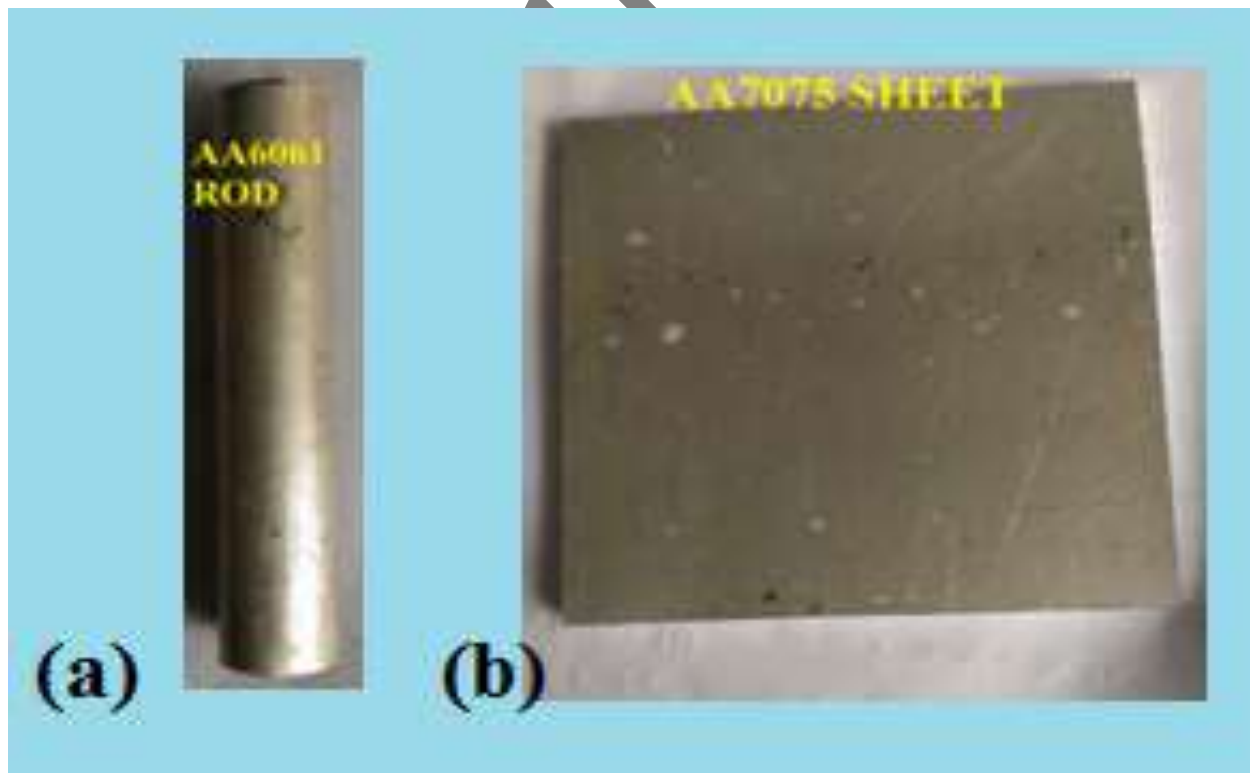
(a) AA6061 rod and (b) AA7075 sheet
